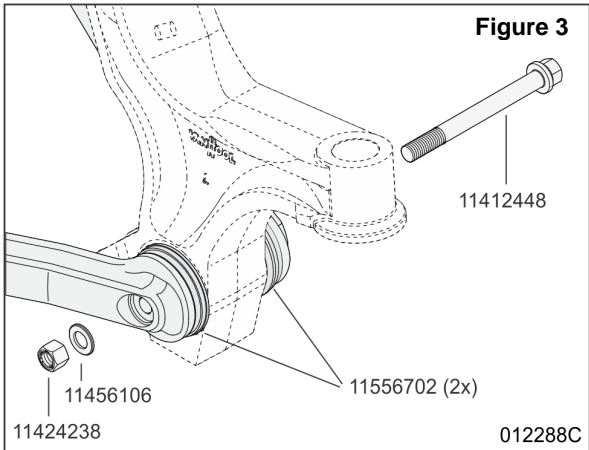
Fastening of wheel-suspension arm joints (figure shows front-wheel suspension)
